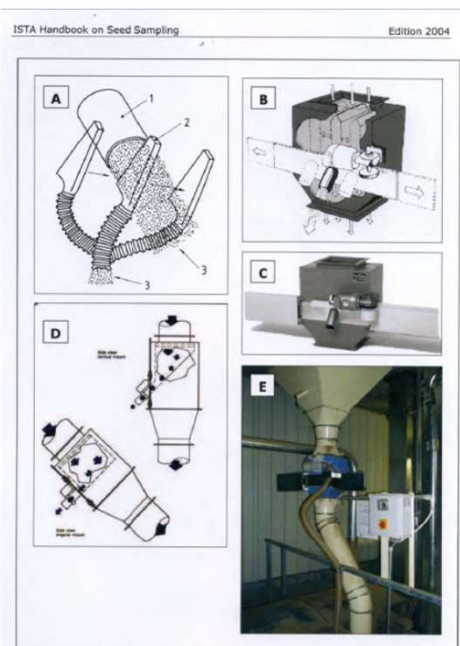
Automatic seed sampler of the moving beak type. A: A drawing of the working principle of this type. B: A drawing of a device with an insight view. C and E: Example of an automatic seed sampler of the moving beak type. D: drawing of a type that can be used in an angular mount.
